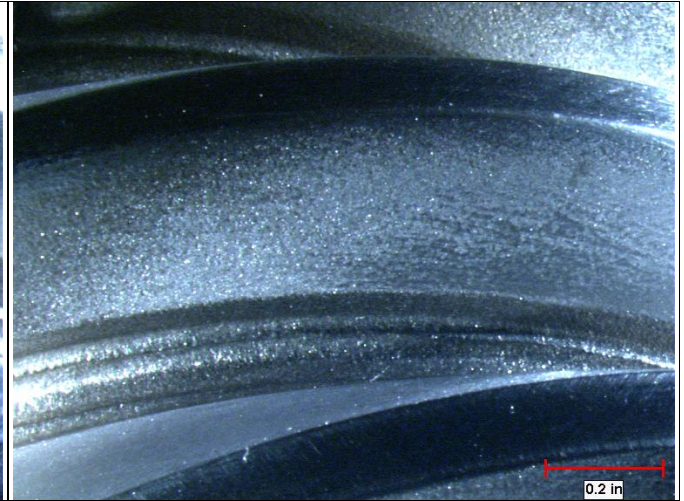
V1L500 MID-TOOTH FLANK AND ROOT
